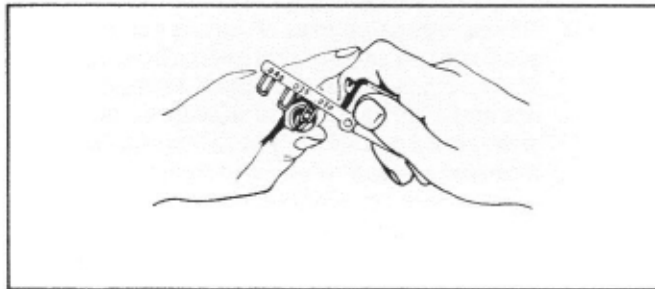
Checking Spark Plug Gap with Wire Feeler Gauge
